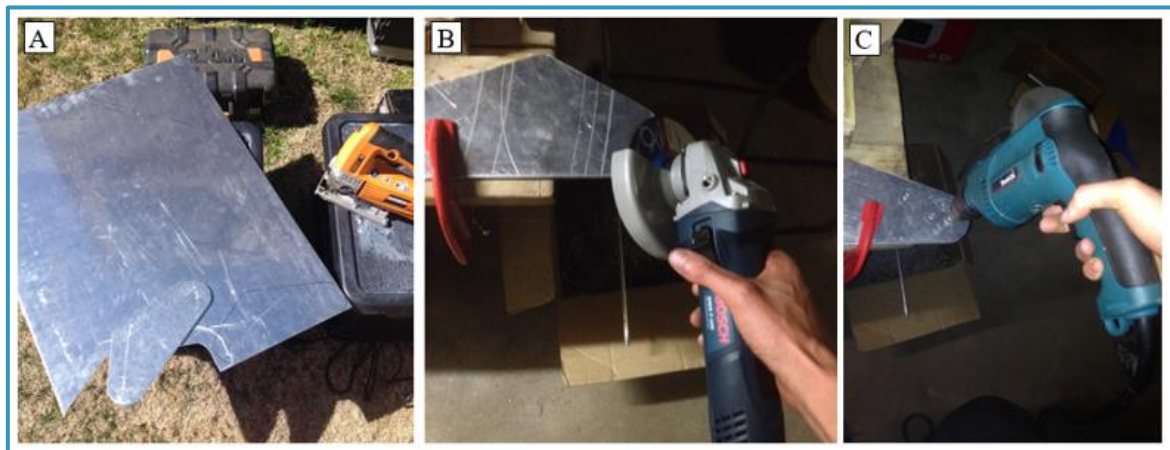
A) Cutting out side plates, B) Grinding side plates, C) Drilling side plates
